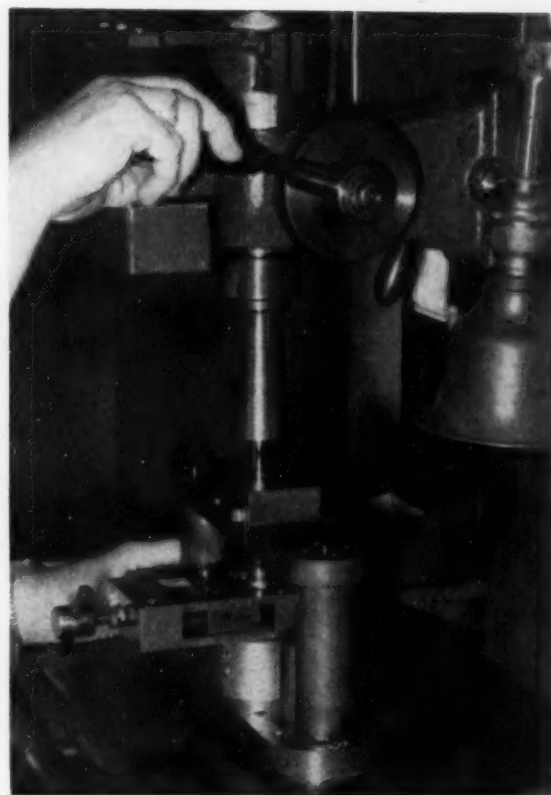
Only simple equipment is needed. Tubular blank on mandrel is rotated between rollers. Pressure on drill-press feed lever extrudes the part.
